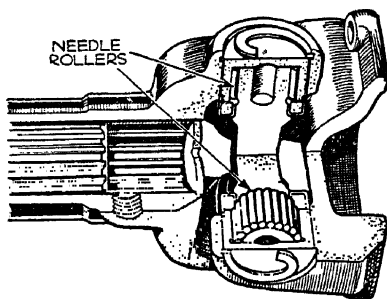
The Hardy Spicer Needle Bearing Universal Joint.
